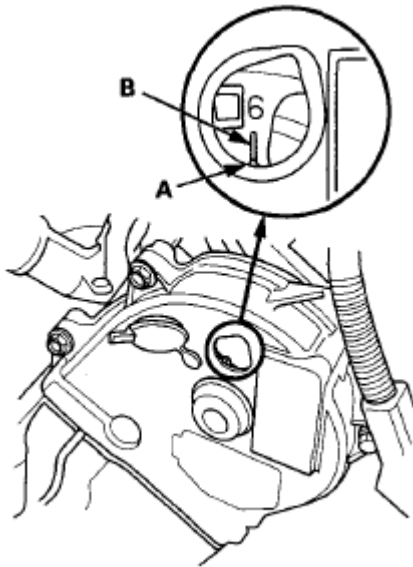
Identifying Pointer And TDC Mark On Piston No. 6
